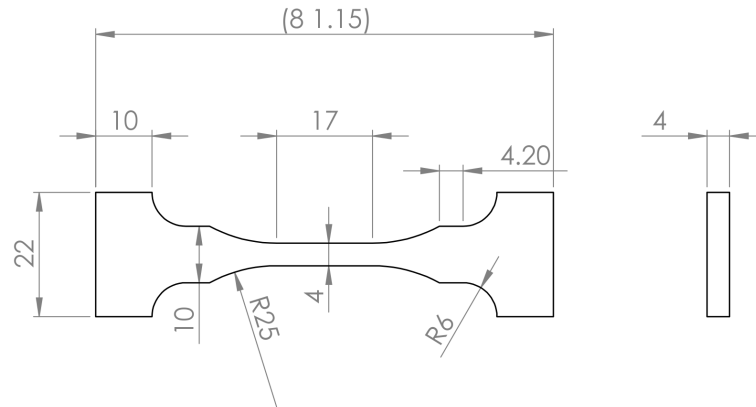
Design of the Single-Section Sample. Dimensions in millimetres.
